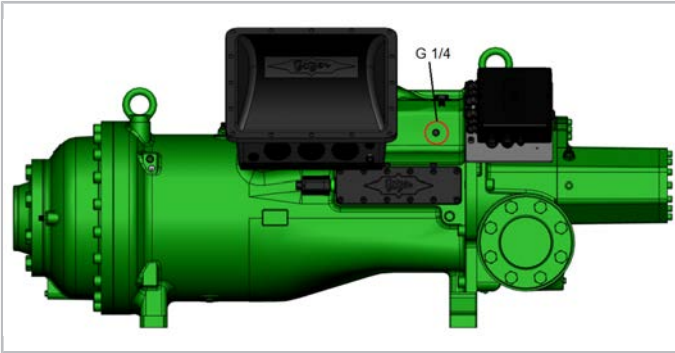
Side view HS.9593, the red outline indicates the additional bore with a set screw (corresponds to entry 24 in the dimensional drawing, see Operating instructions [SB-110](#) or BITZER SOFTWARE).
